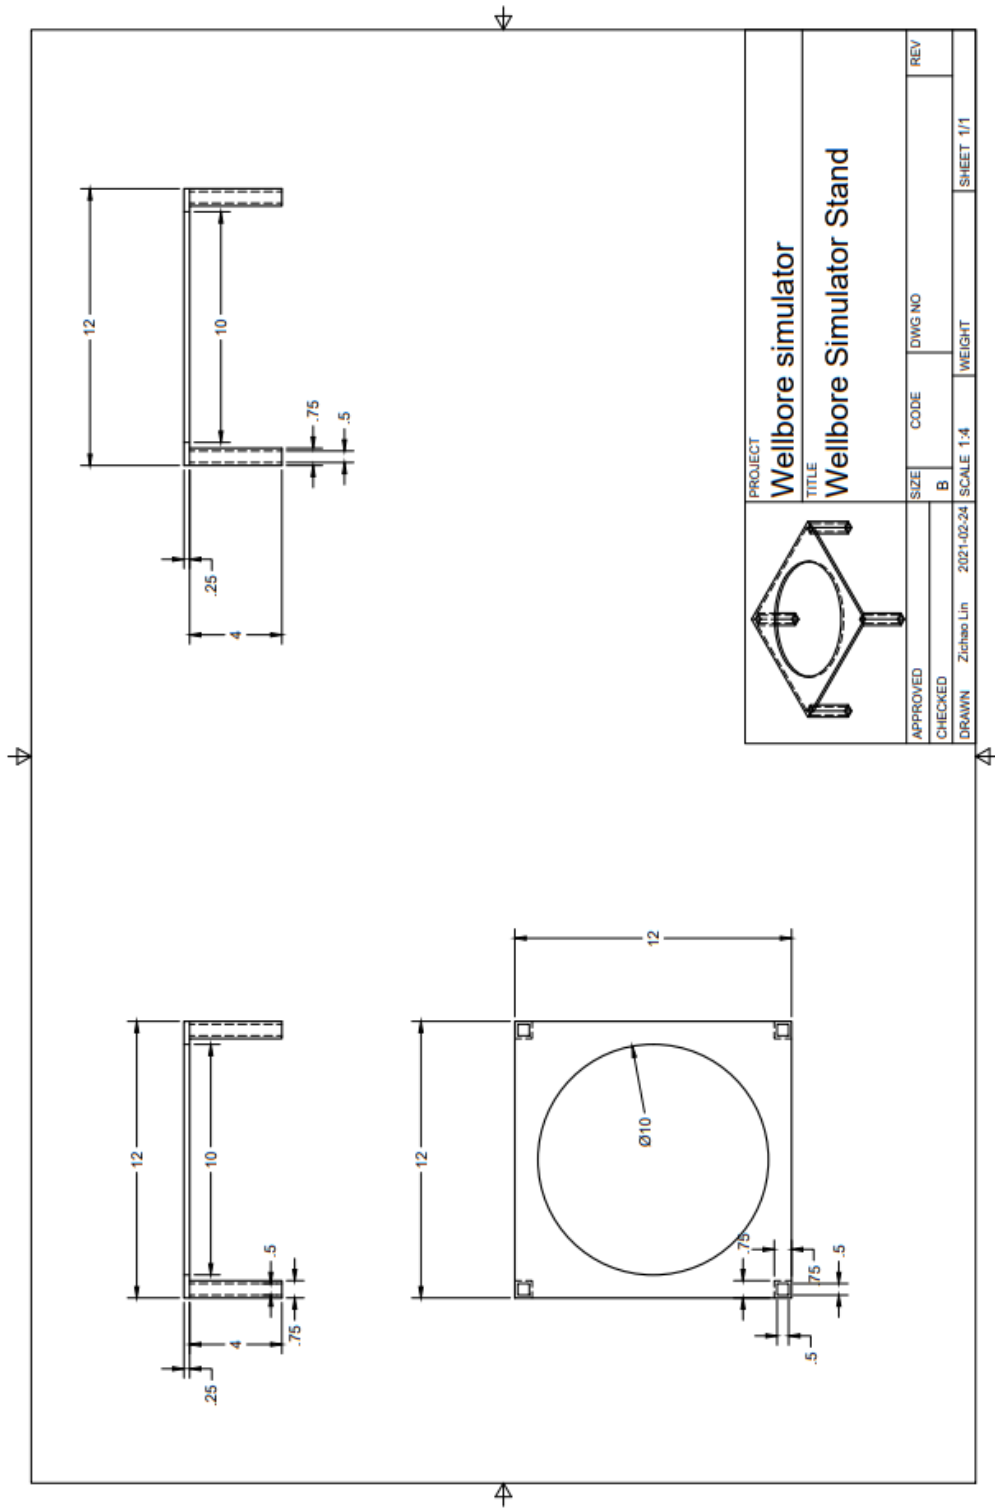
Final CAD drawing for the wellbore simulator stand
